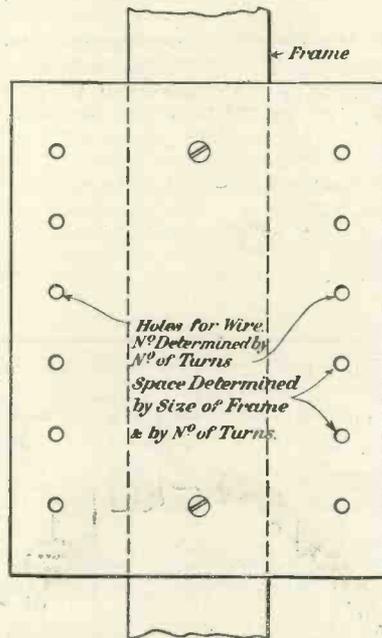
Guide and insulator for holding the windings in position on the frame.
